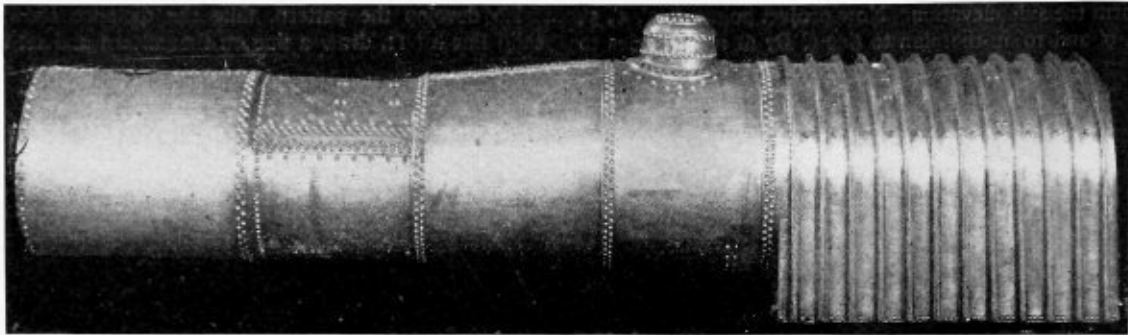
VIEW OF COMPLETED BOILER WITH JACOBS-SCHUPERT FIREBOX.
